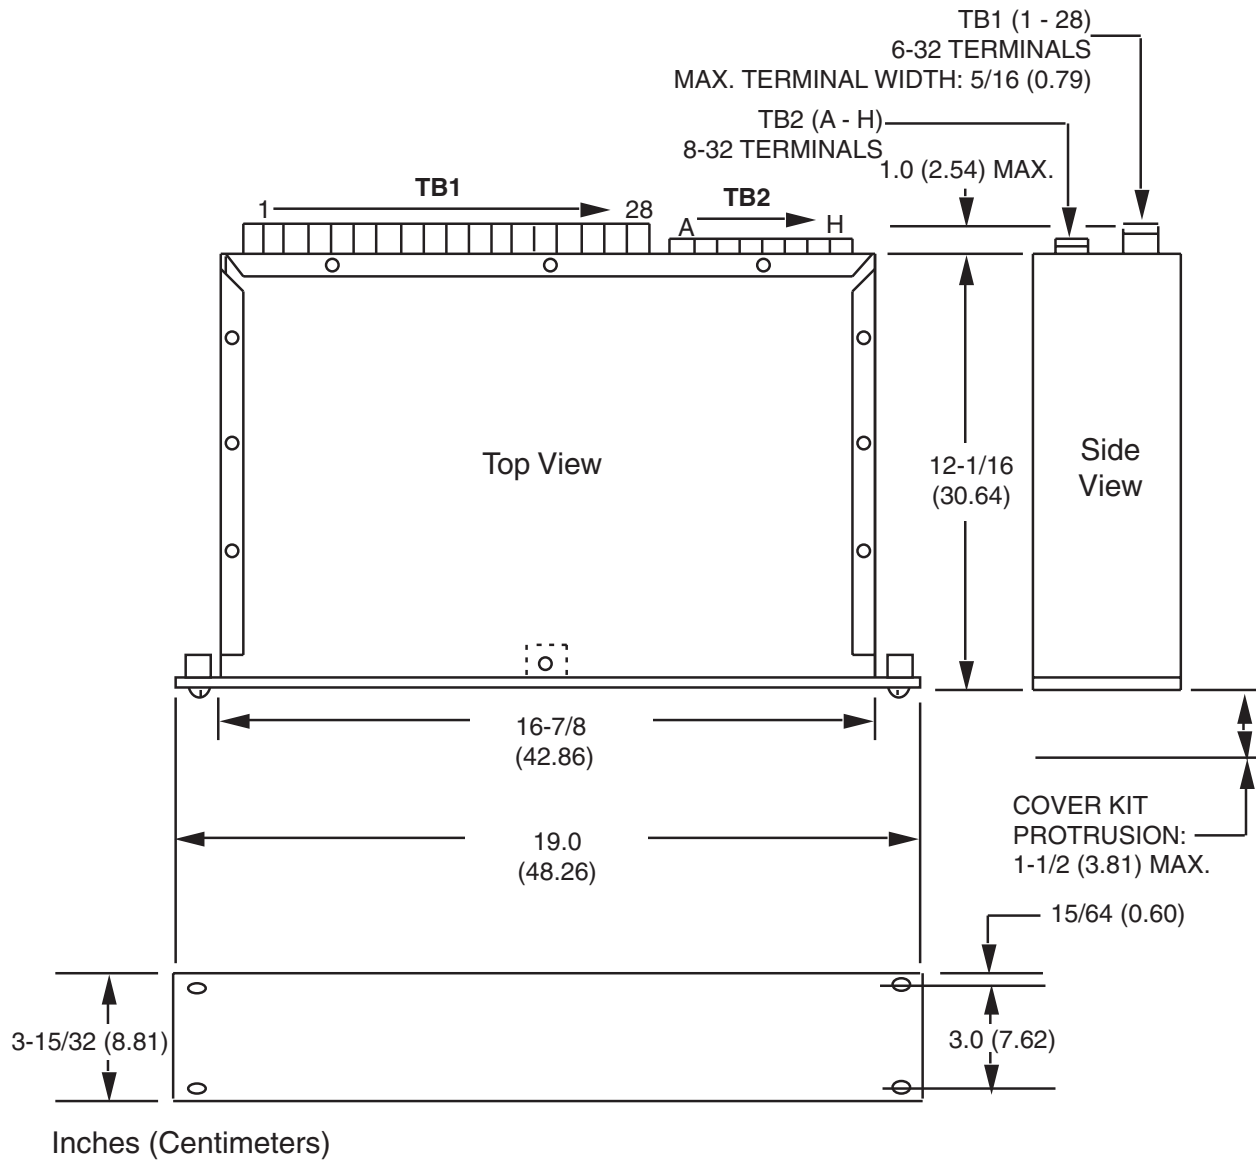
Outline Dimensions for all Syncrocluser® Equipment Chassis
